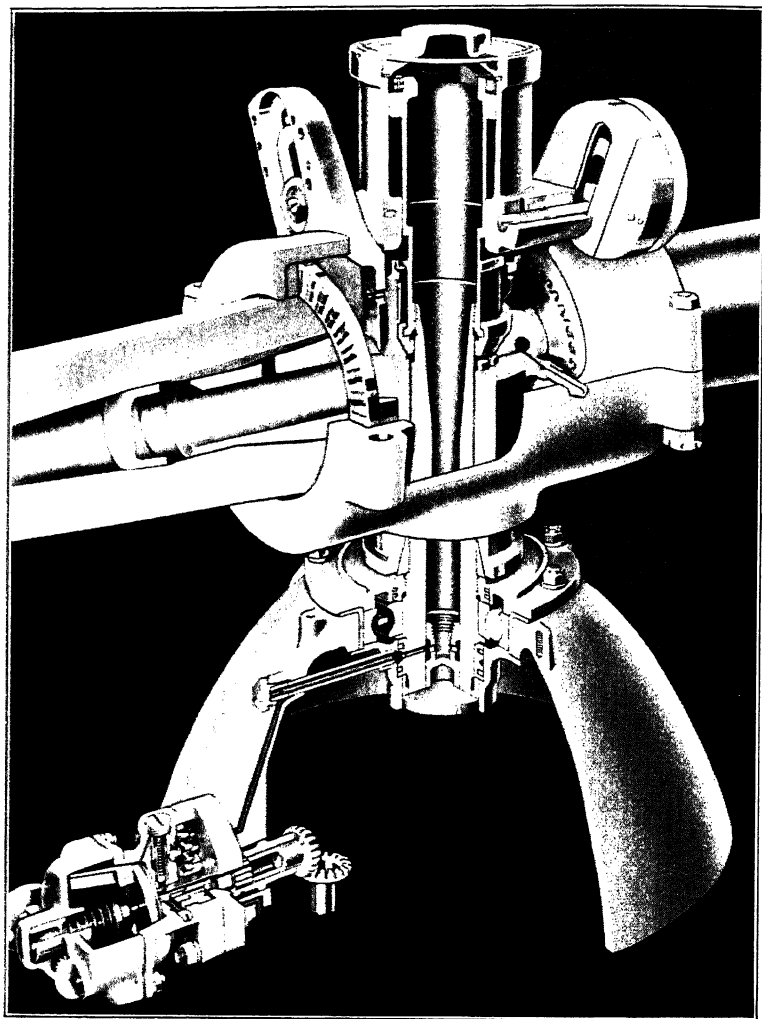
Hamilton Standard constant-speed propeller assembly. (Courtesy Hamilton Standard Division, United Aircraft Corp.)
